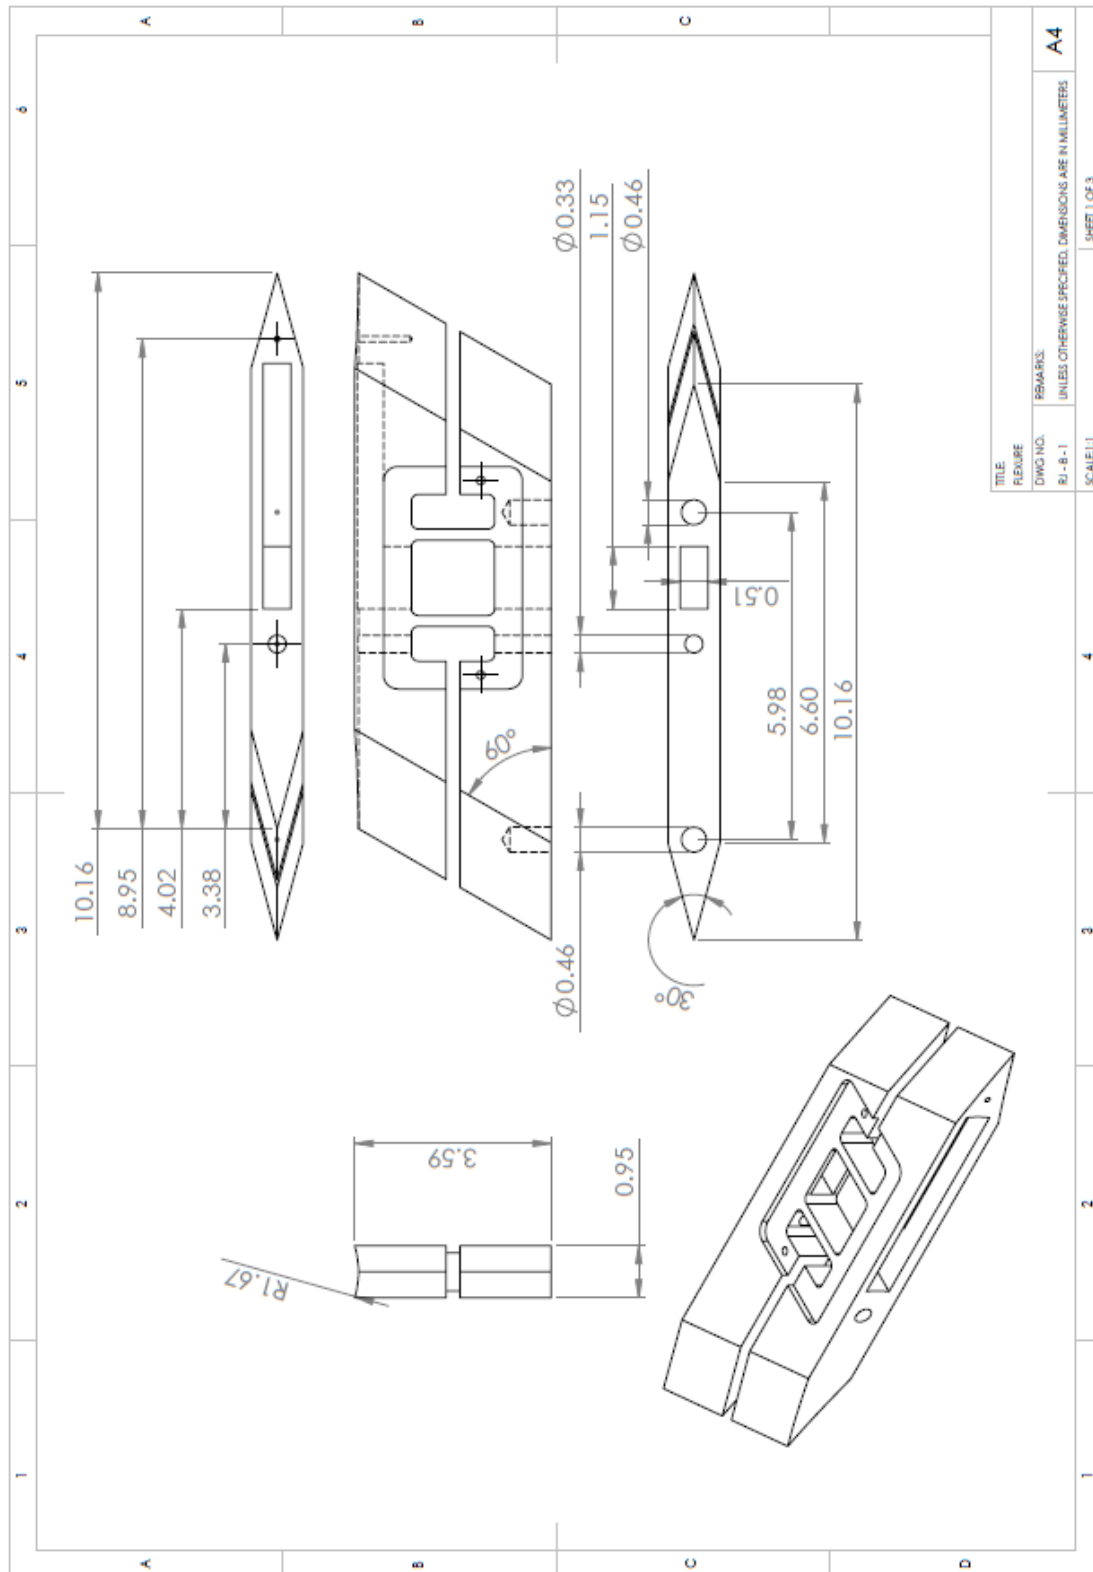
Part drawing: Flexure (RJ – 8 – 1)
